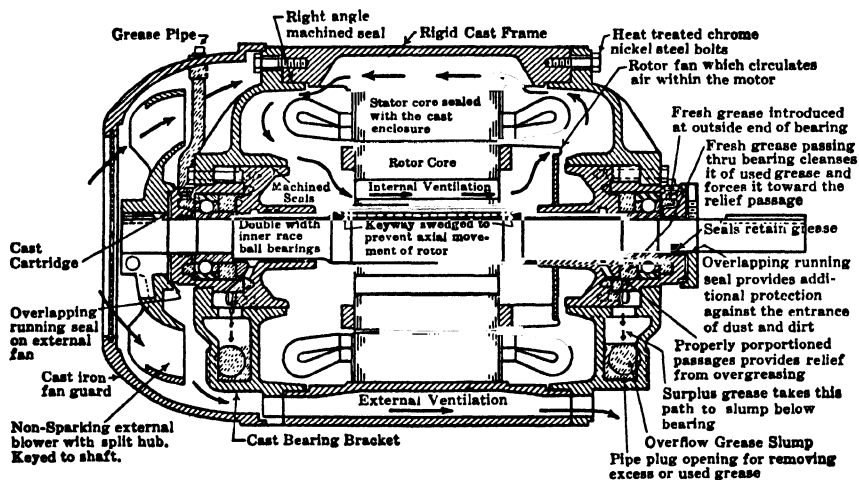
Air flow in a totally enclosed fan-cooled, squirrel-cage motor.
